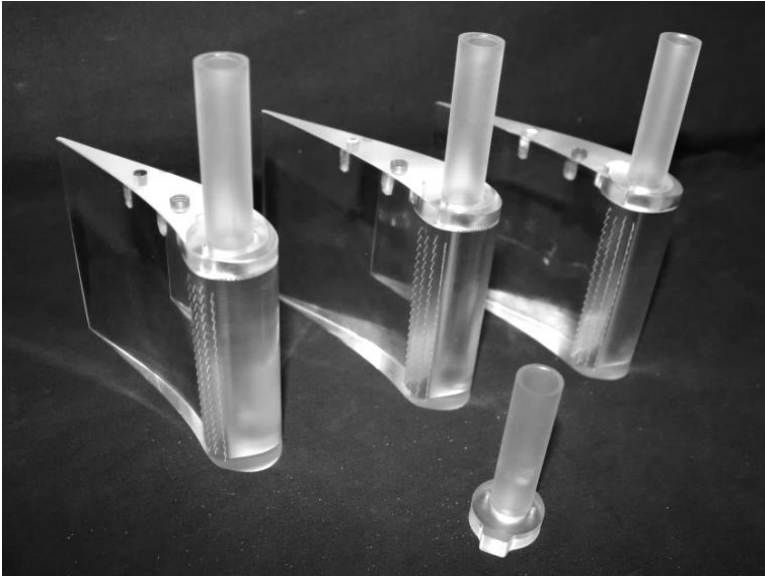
Manufactured vanes with showerhead cooling scheme
